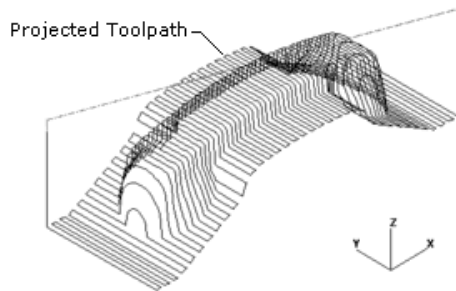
The zig-zag tool path projected onto a milling surface⁸.
